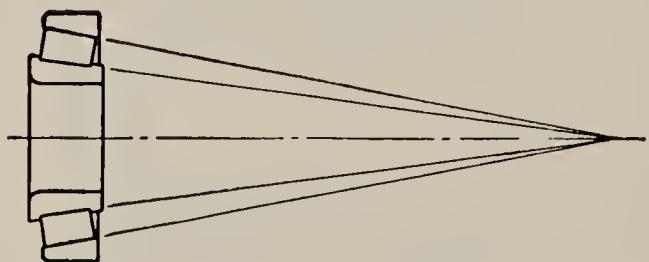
Elements of conical surfaces intersect axis of bearing.
